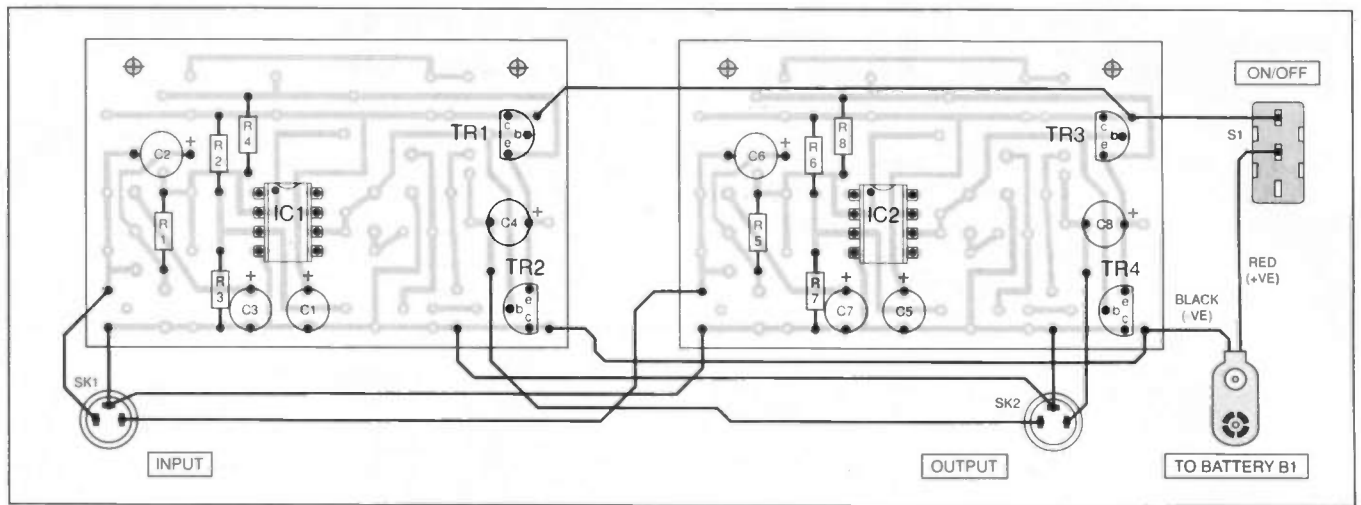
Printed circuit board component layout, copper foil master and interwiring for the Personal Stereo Amplifier. Double-check positions of components before soldering in place. Suggested layout of components inside the case is shown below.
